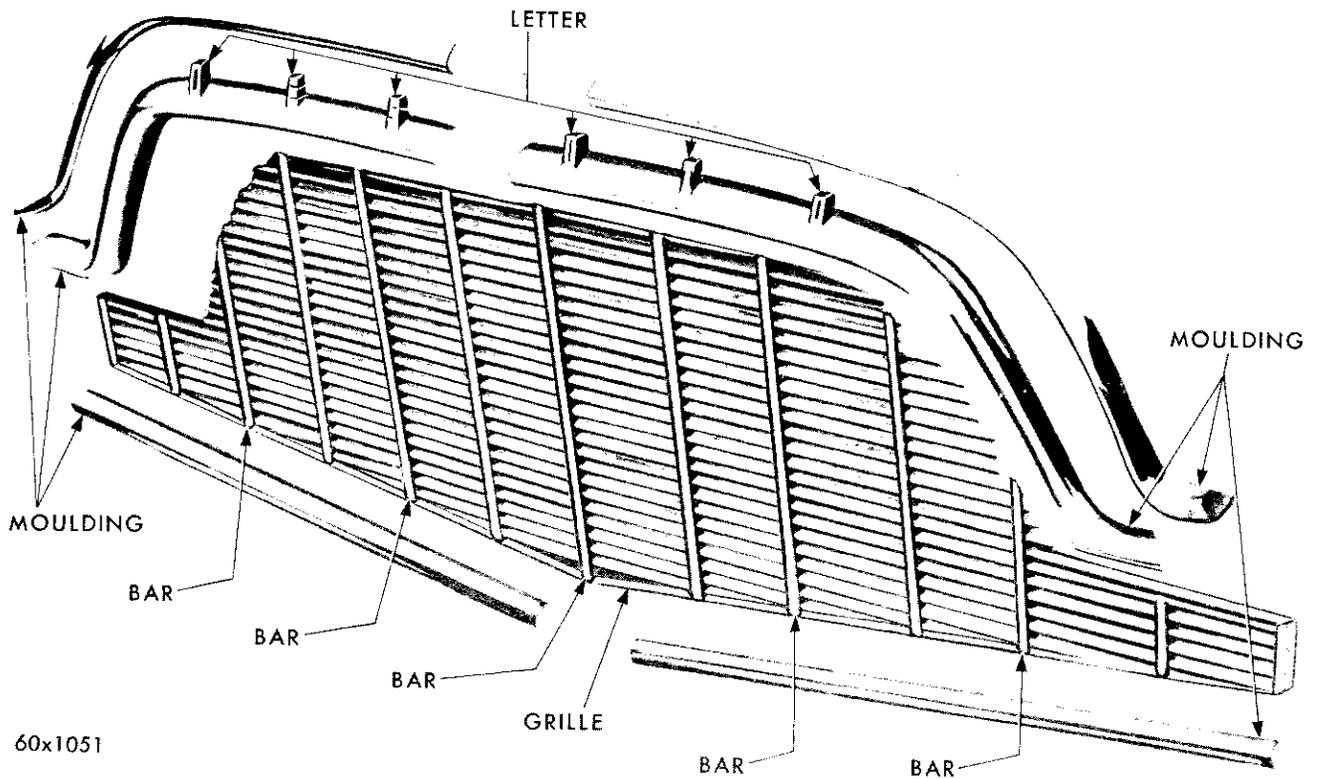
Grille Assembly (Exploded View) (DeSoto)
